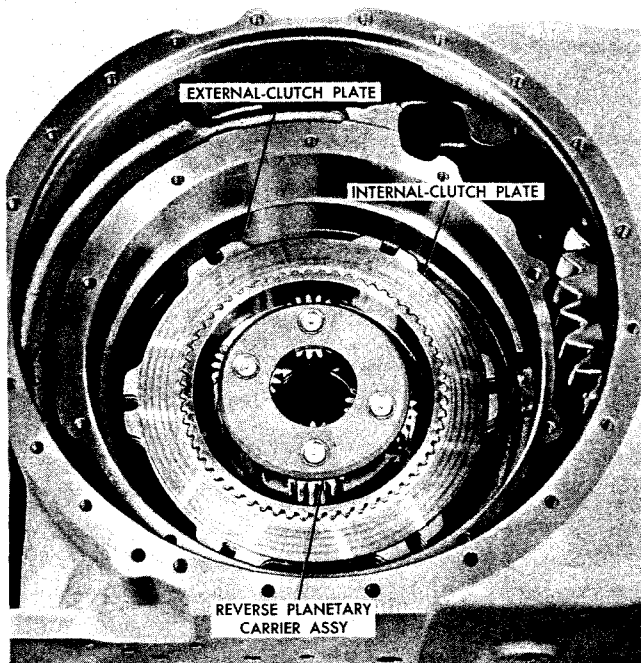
Removing reverse-range planetary carrier assembly and clutch plates
